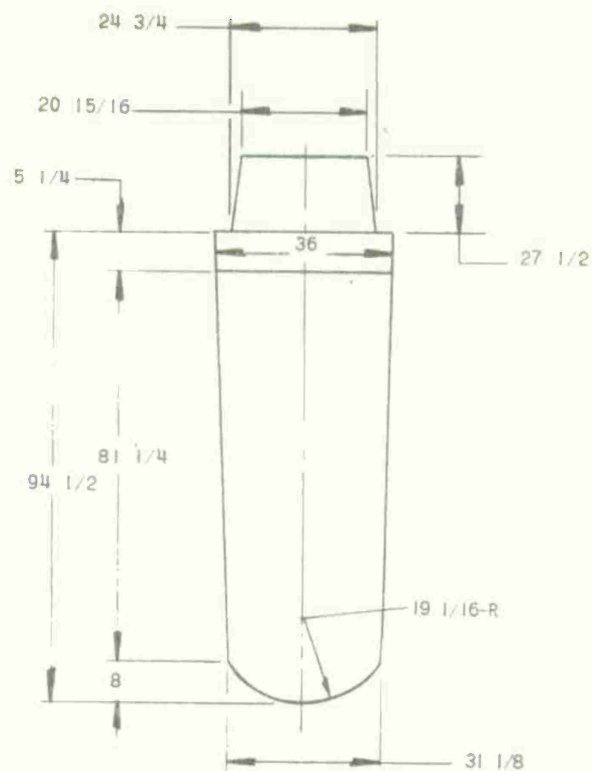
Schematic illustrating stepped cylindrical forgings.
